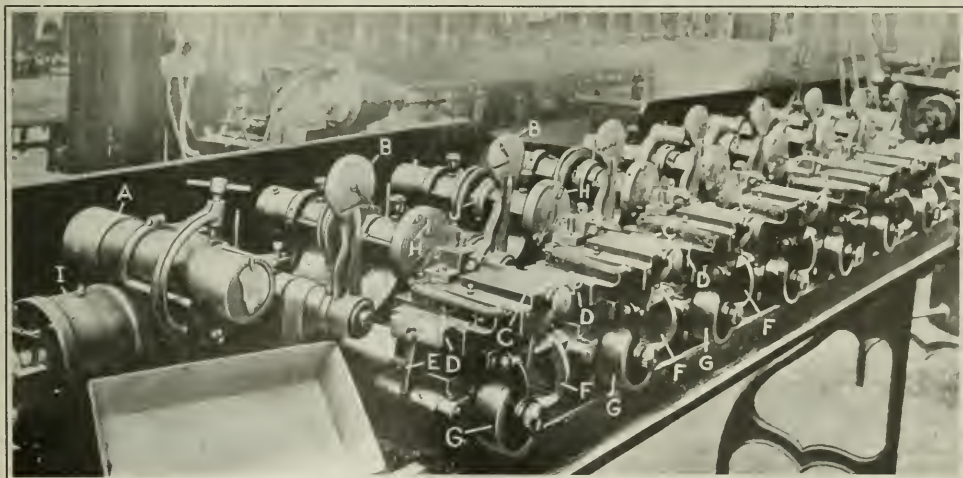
Automatic Multiple-spindle Watch-plate Recessing Machine
